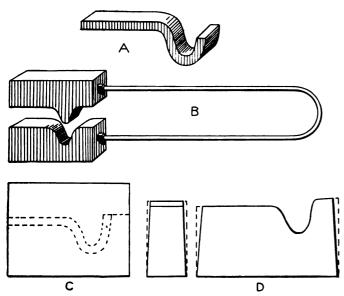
A BENDING JIG AND HOW IT IS MADE.
